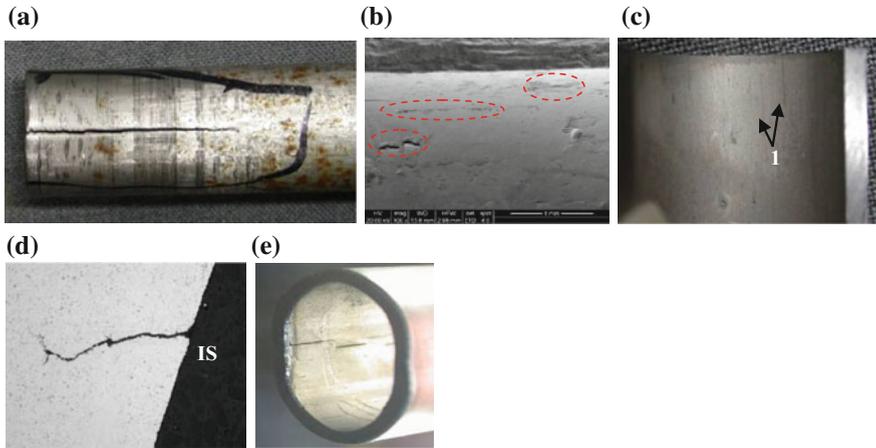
a The titanium tube edge with crack. b SEM photo of the fracture inner surface of the tube (marked with red circles—cracks). c Macroscopic section through the tube (200 mm from the edge, inner surface): 1—cracks. d Microscopic cross-section through the tube (200 mm from the edge—crack tip). IS—inner surface. e New titanium tube after flattening test (cracks were formed inside)
